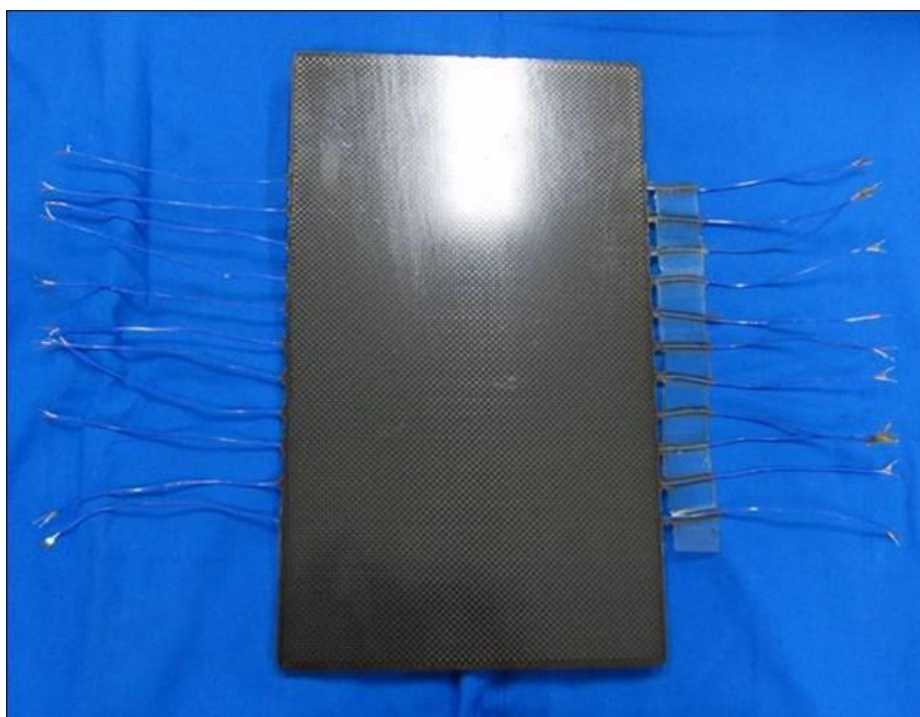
Completed test piece which was buried K type thermocouple
